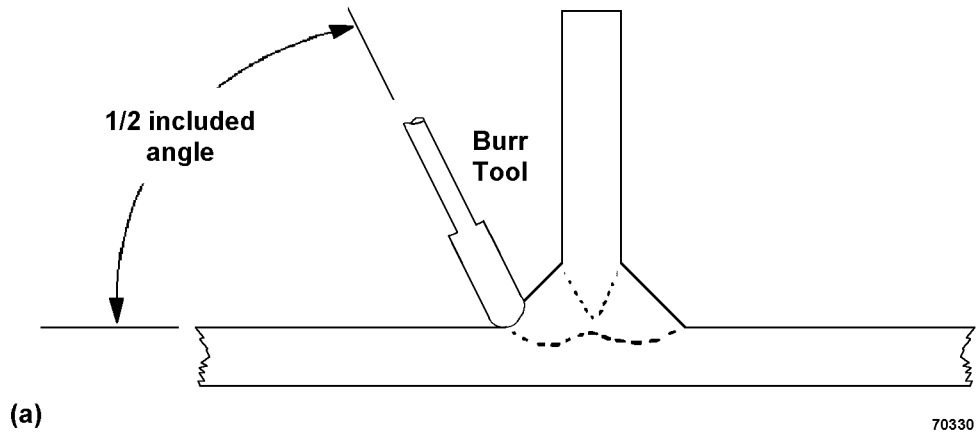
TOE GRINDING WITH A ROTARY BURR
